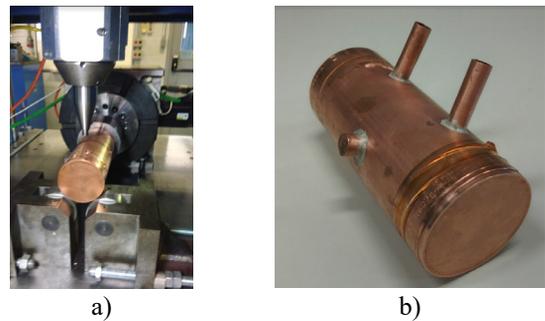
(a) Friction Stir Welding (FSW) on the CuCrZr component. (b) FSW-welded component.
